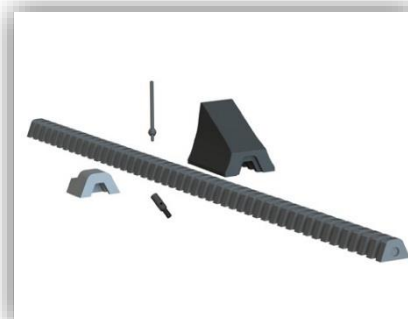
Pipe Stop 100 parts: rails, block, connector, end stop, tool
